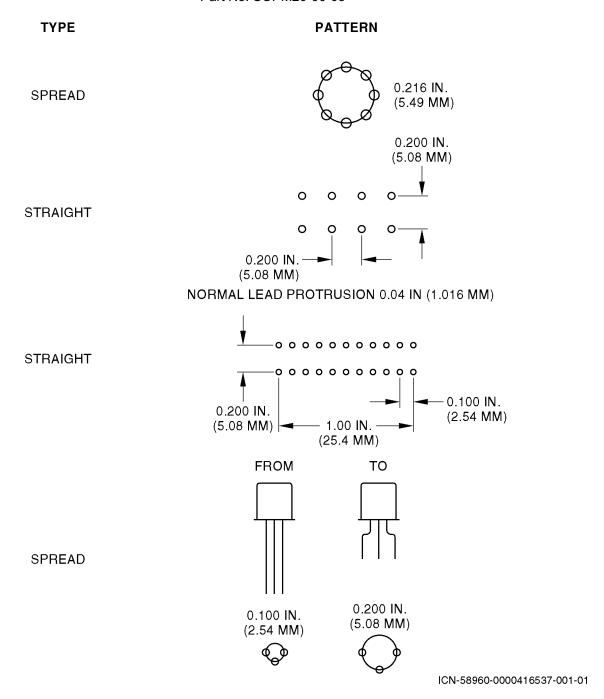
(Sheet 5 of 8) Lead Patterns and Dimensions
